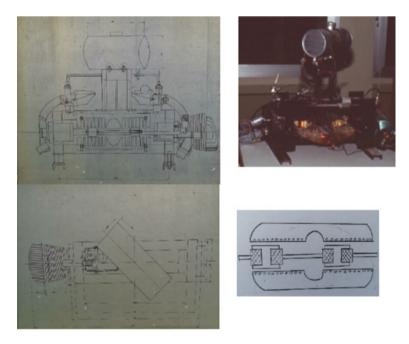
Blueprints from the EIC engine design, the assembly phase of the E.I.C. engine, sketch of the electric stator and reciprocating magnetic field windings, Machine Design Lab, University of Patras, 1976
